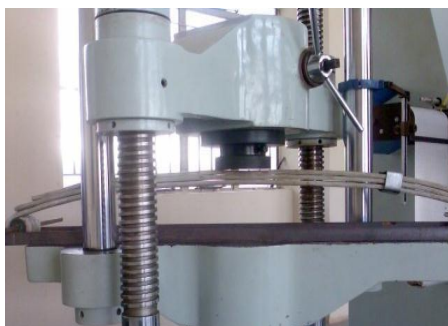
(B) Composite Leaf Spring under loading condition on Universal Testing Machine
